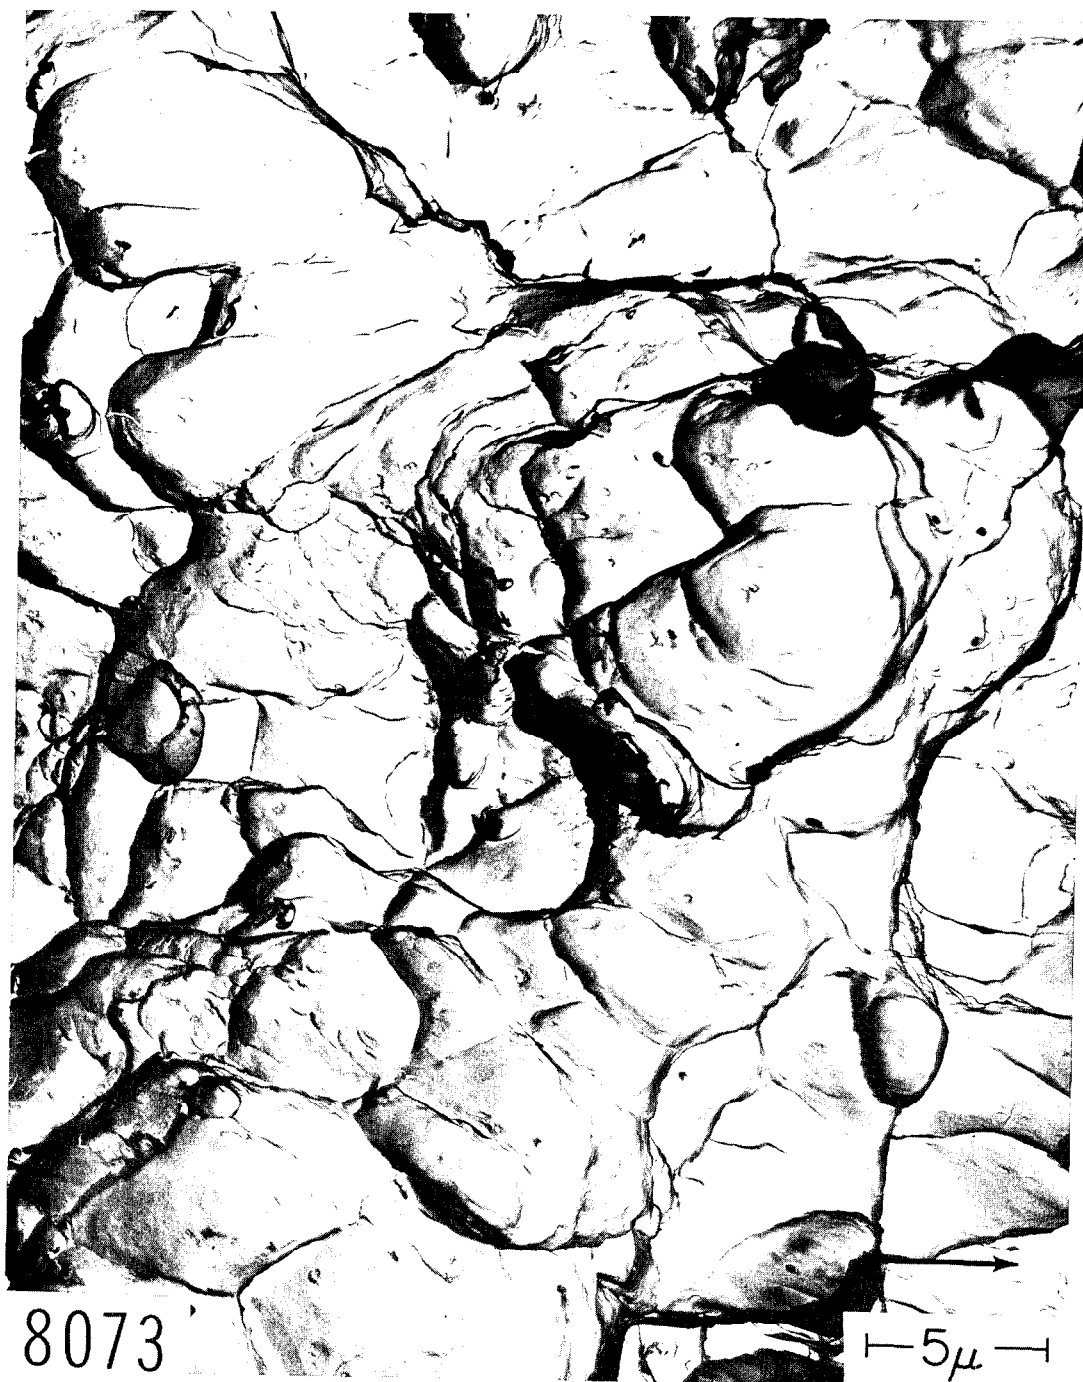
Dimples on the overload fracture surface in maraging steel weld metal. Cellulose acetate-carbon replication technique. Palladium shadowed. 6000X.
